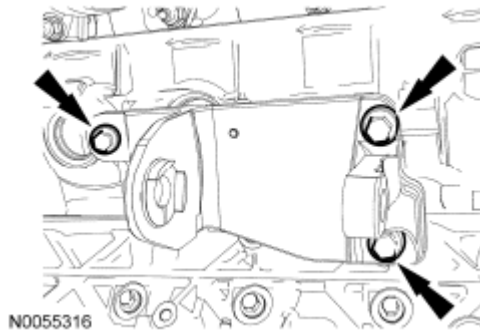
Locating RH Engine Support Insulator-To-Cylinder Block Bracket Bolts
